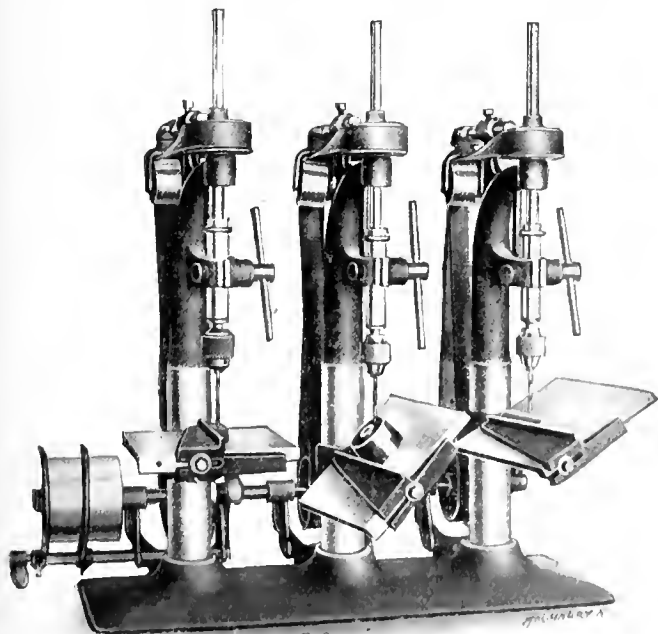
Rockford Three-spindle Bench Drill, showing Use of Tilting Table and Adjustable Gauge
